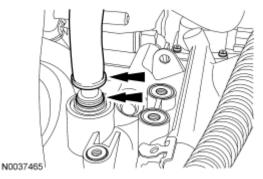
Locating Locking Ring And Brake Booster Vacuum Supply Tube Courtesy of FORD MOTOR CO.
